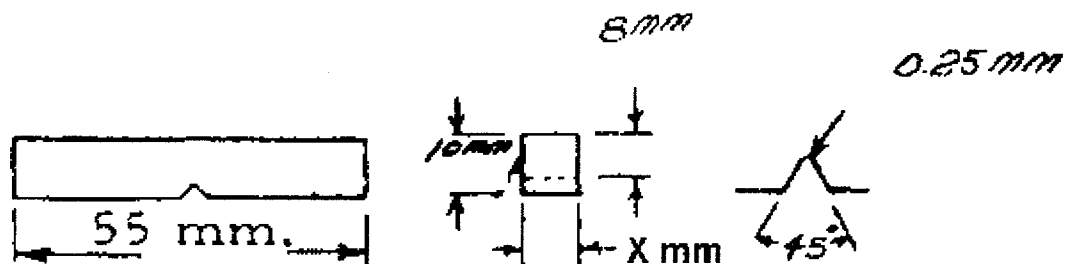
ASTM E23- Charpy Dimensions⁴⁷
